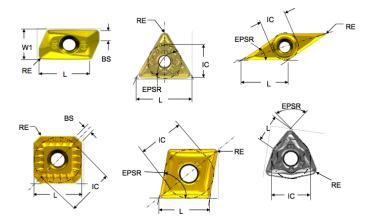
Cutting Tool Measurement Diagram 3 (Cutting Item – ISO 13399)
